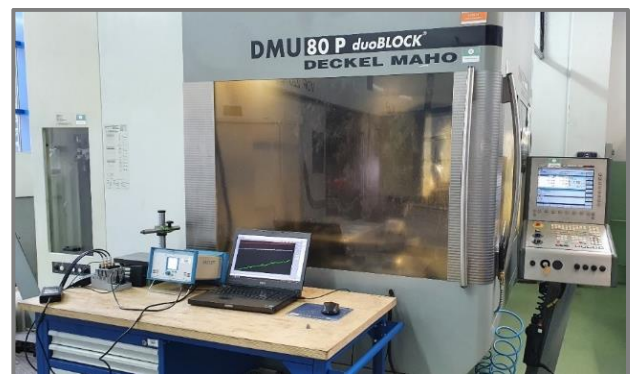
Test stands built based on the DMU 80 P duoBlock CNC milling machine
